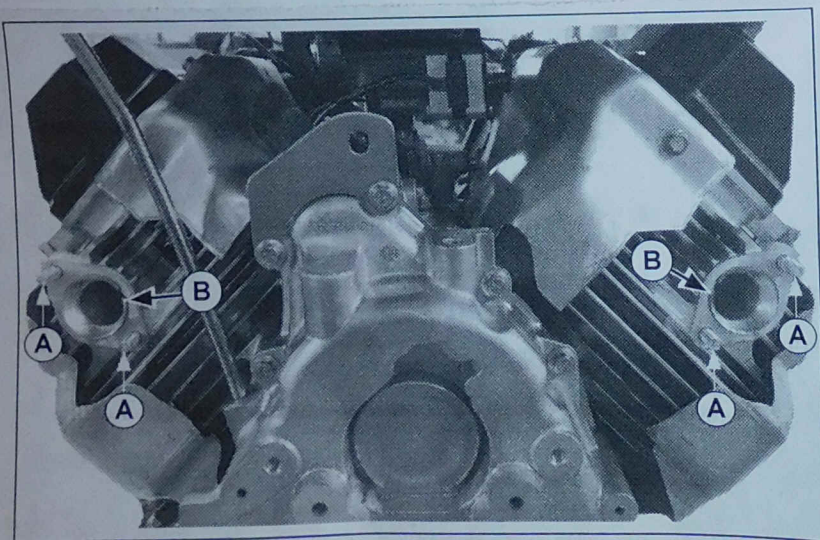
Exhaust Studs and Exhaust Port Liners Installed.
